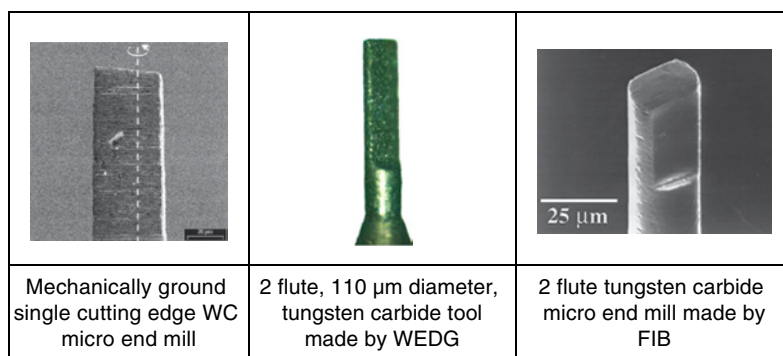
Micro tools produced by mechanical grinding, electrical discharge grinding and focused ion beam machining. (left) Reproduced from [15]. Copyright 1999 Elsevier. (centre) Reproduced from [11]. Copyright 2007 Elsevier. (right) Reproduced from [12]. Copyright 2011 Elsevier
